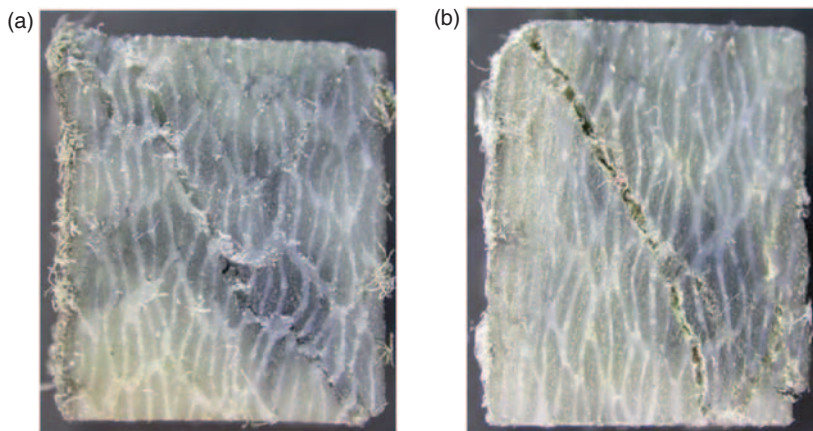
Out-of-plane shear failure mechanism in 90° specimens: (a) glass/epoxy specimen, (b) glass/silica/epoxy specimen.
